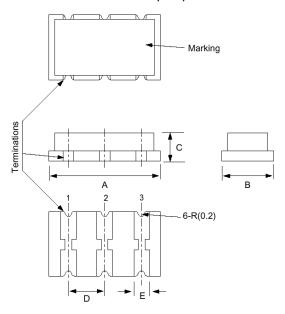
ECS-SR-B Series - Top, Side, Bottom &d Views
